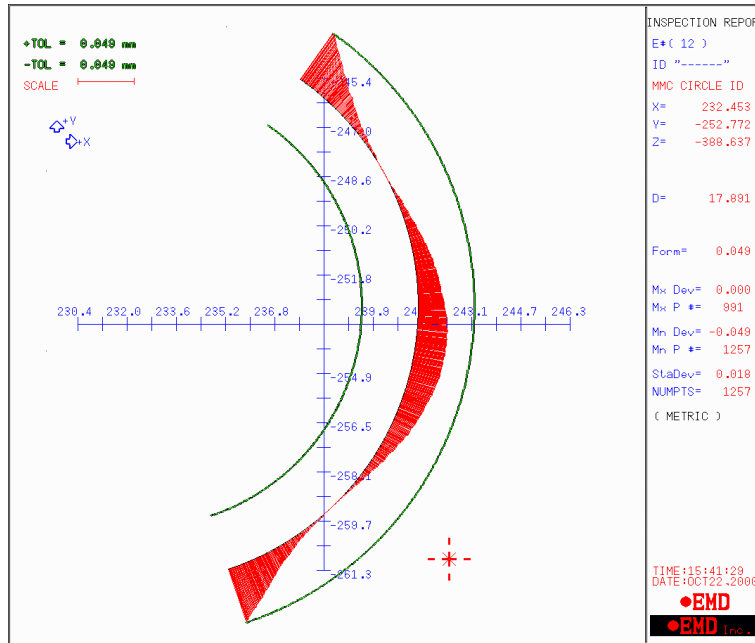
Spherical Evaluation of the six ball races simulating the functional path of the balls in the joint assembly.
